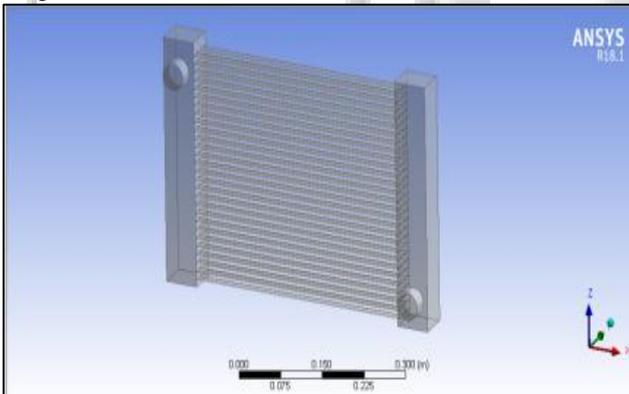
ANSYS Actual Design of Elliptical Tube Automotive Radiator (Wagon-R)
